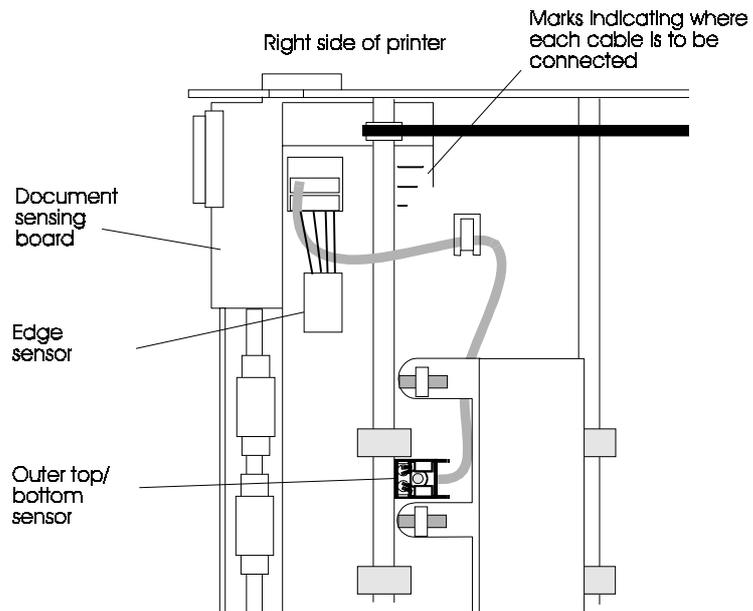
Position of the document sensors. The figure shows the printer on its left side with the bottom plate swung out
